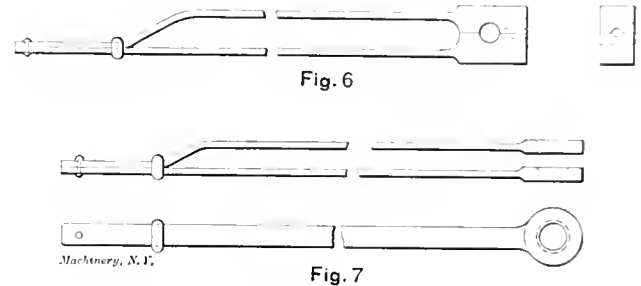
Swages for Making Blank-headed Eye-bolts. Fig. 7. Swages for Forging Hubs.
